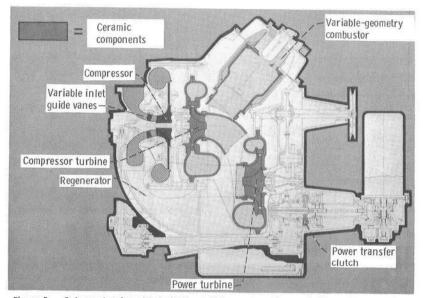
Cutaway drawing of Detroit Diesel Allison automotive gas turbine. (From ref. 5.)
